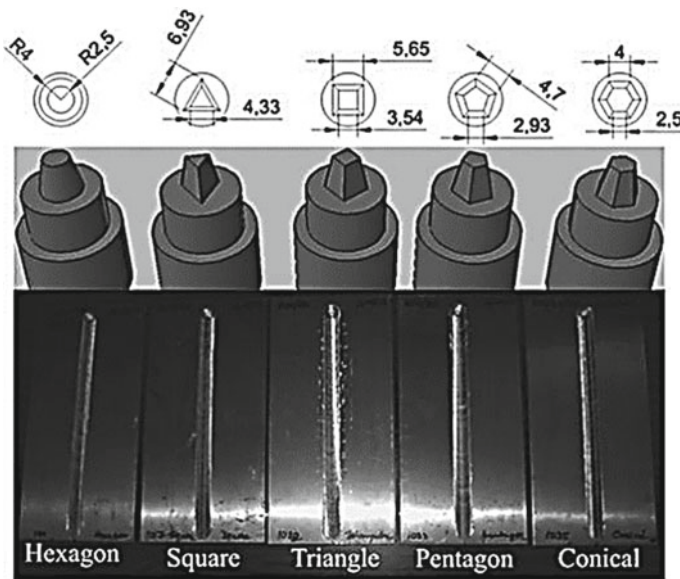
Five different pin tool shapes and weld joints [28]
